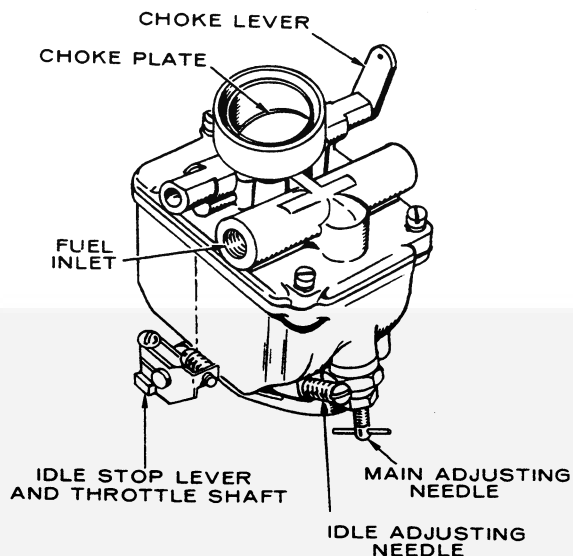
GASOLINE IDLE ADJUSTMENT
